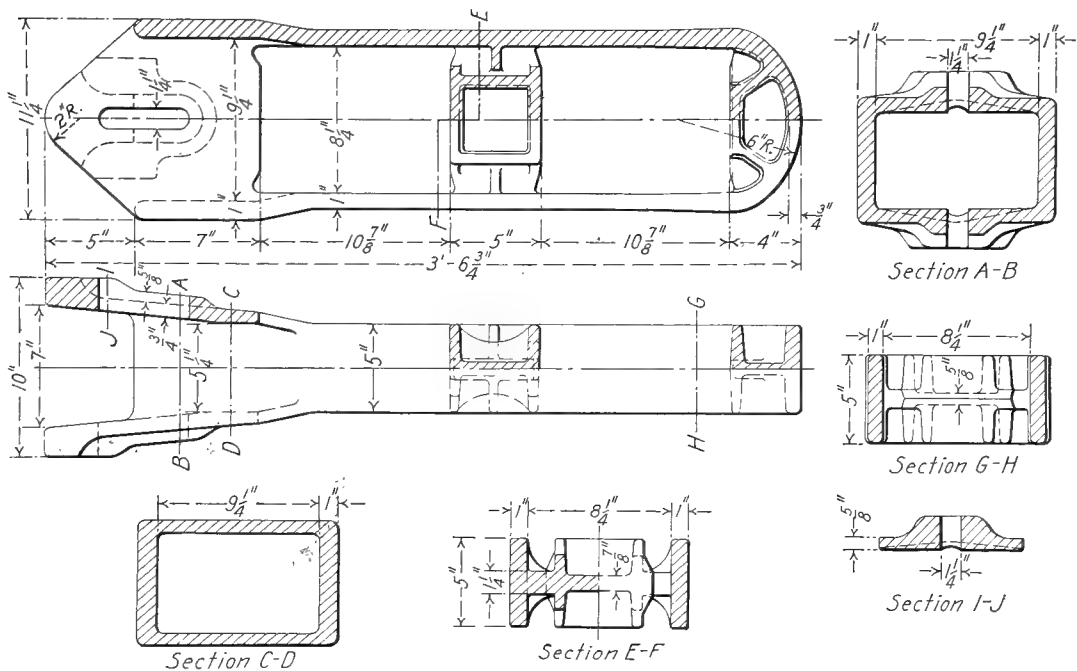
Buckeye Yoke for 8 in. by 8 in. Tandem Gear. Buckeye Steel Castings Company.
